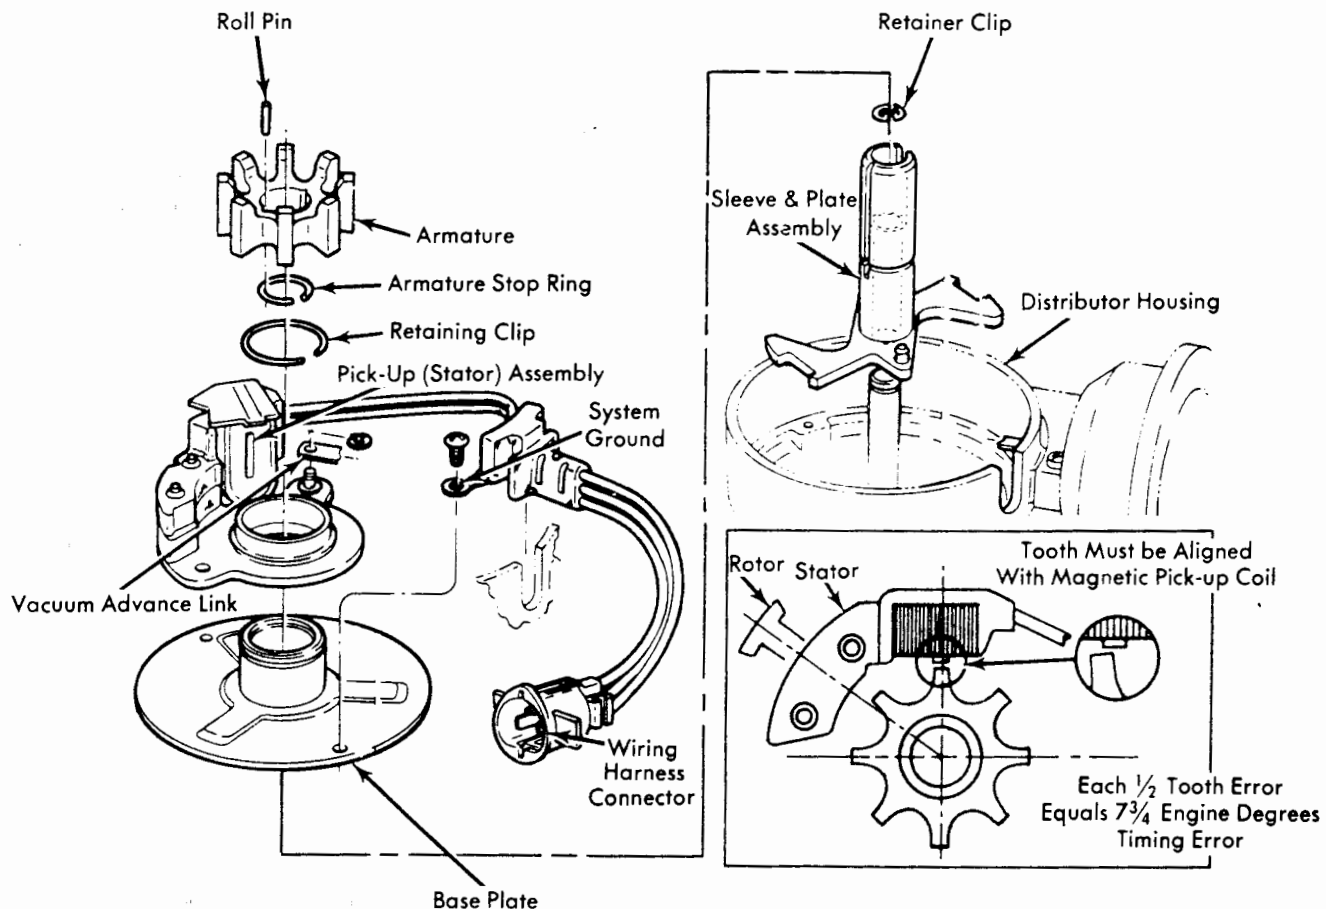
Exploded View of Dura-Spark Distributor Showing Correct Alignment of Rotor and Magnetic Pick-up Coil Teeth
